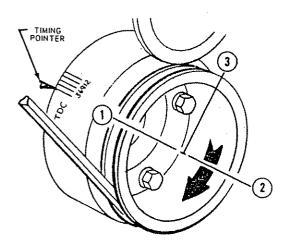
Position of Crankshaft for Checking and Adjusting Valve Clearance
